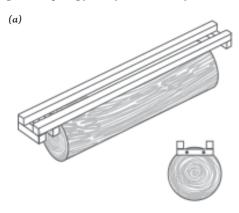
Preparing for the first cut with a frame mill using slabbing rails or board.
